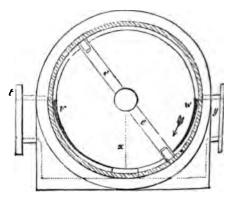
is an end section which will serve to show more clearly the manner a which the engine contracts.
